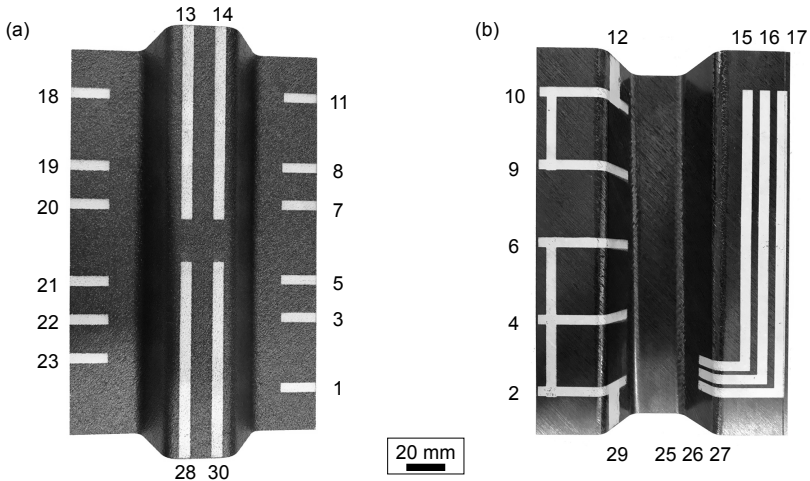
Omega stringer with inkjet-printed conductive paths; (a) Top side; (b) Bottom side; Contacts used for the electrical measurements are numbered.
